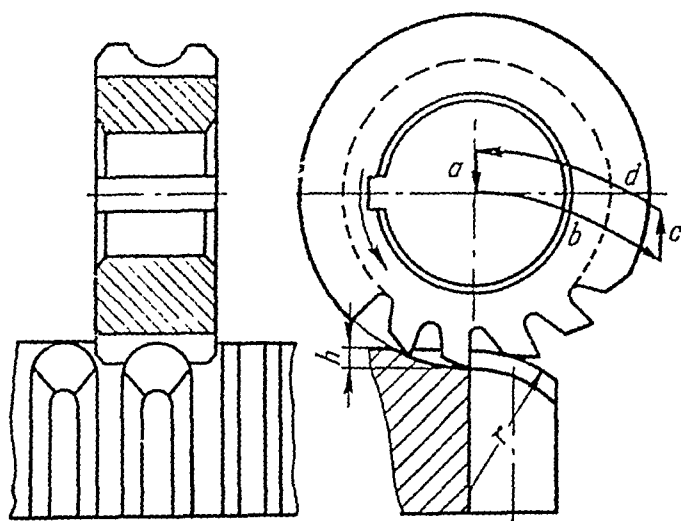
Rounding the tooth ends with an arbor-type formed cutter
